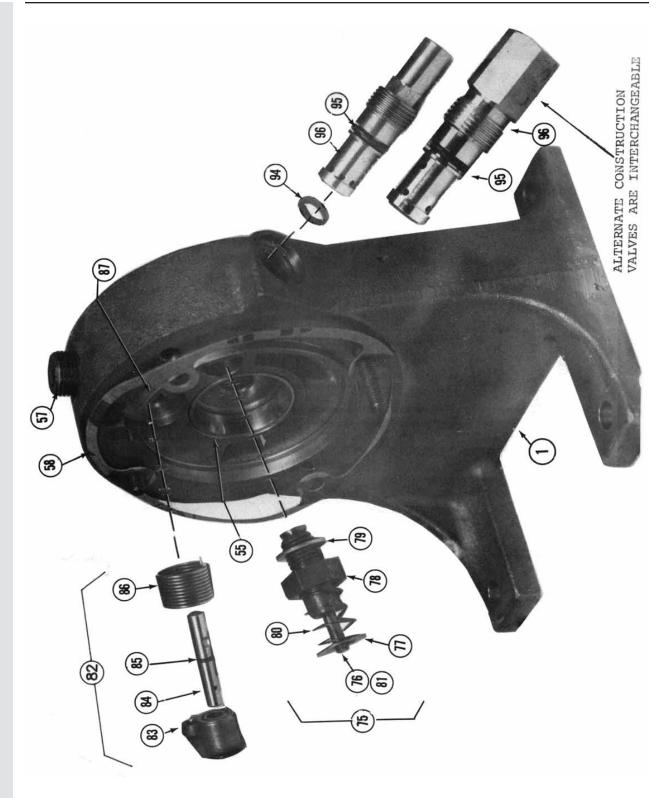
Foot Mounting Plate with Air Vent Assembly, Replenishing Valve and Relief Valve
